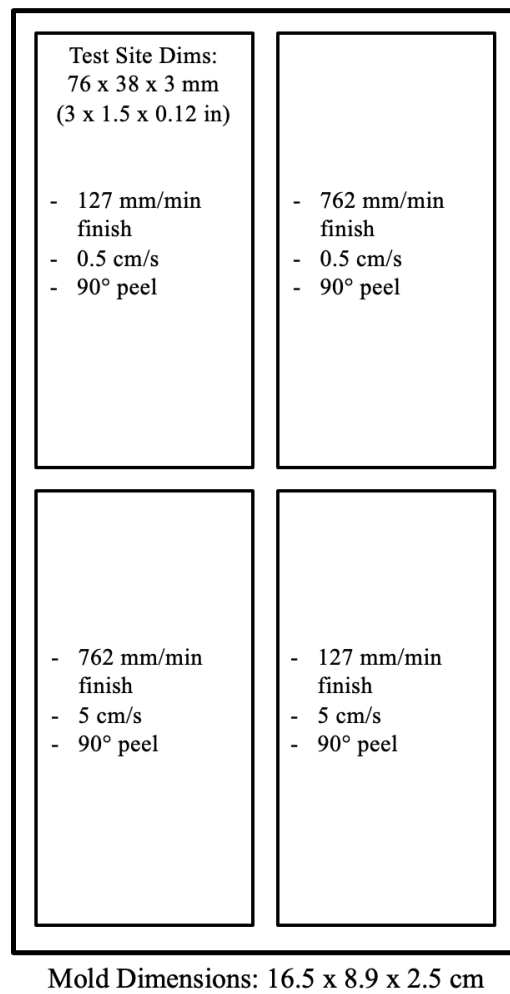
Testing mold with variables of surface finish, peeling speed, and peel angle
